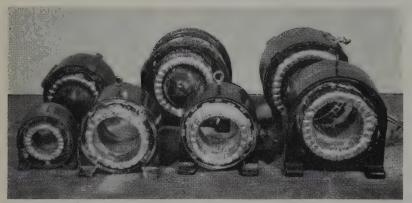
, wide range of size of motors may be encapsulated with but three basic size adjustable end molds.
